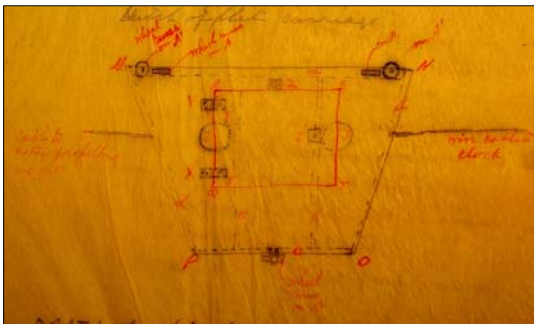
Plate carriage drawing showing the top plate overlay on the skeletal frame; the position of the plate-holder is marked in red (Campbell Copy Book – Mary Lea Shane Archives).
